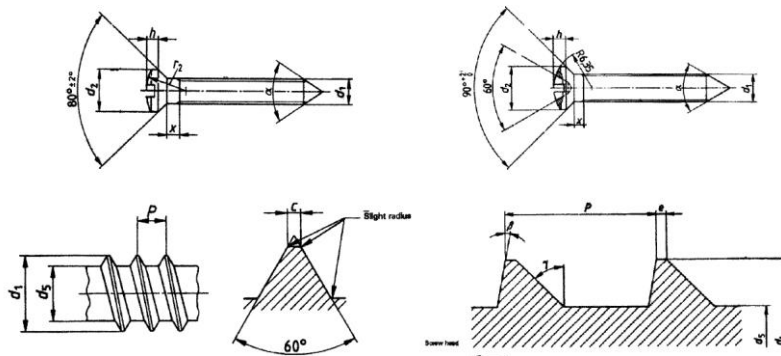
Schematic representation of screw types and threads: Type HC (left), Type HD (right) [64].
